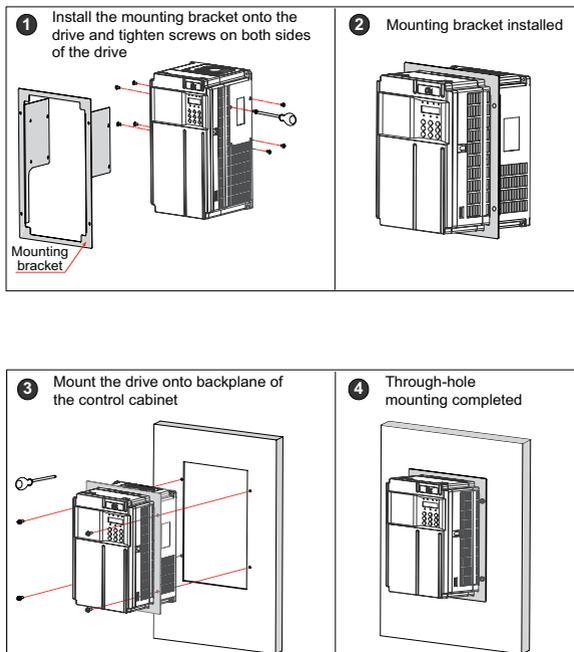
Through-hole mounting of 0.4-37 kW models
